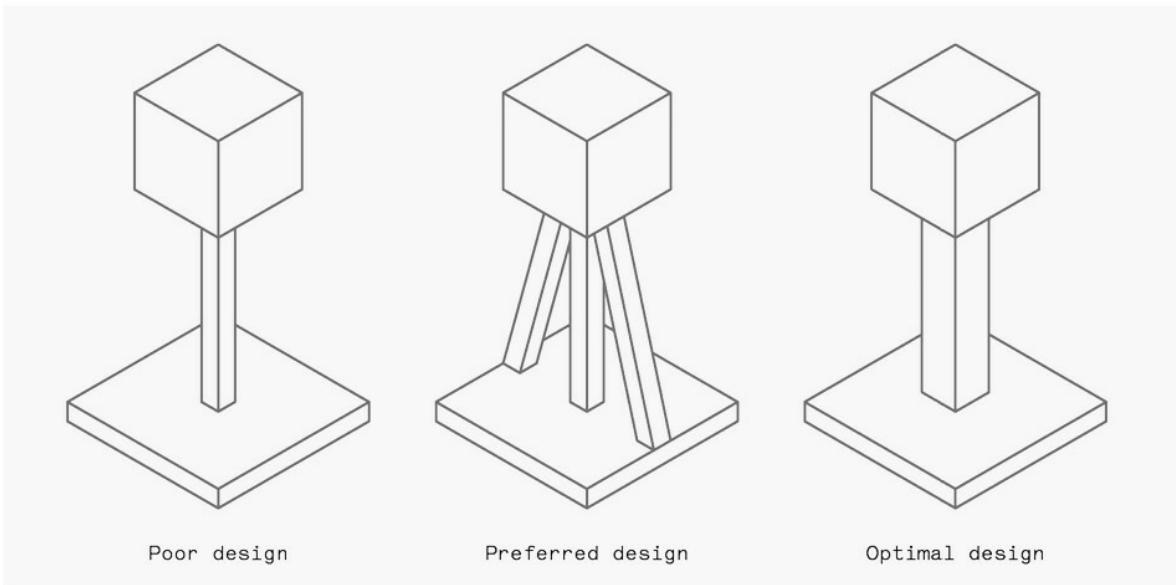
Thin sections attached to large, heavy sections are at a high risk of breaking during post process handling (left). A design should be strengthened by adding bracing (center) or increasing section size (right)
